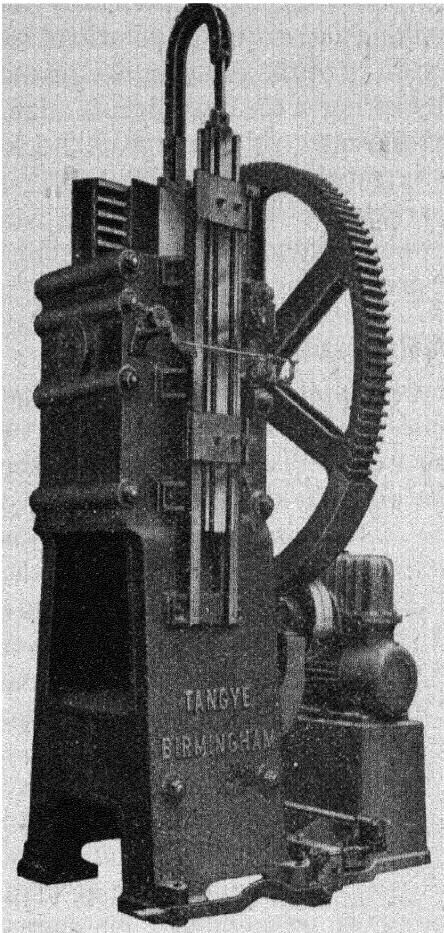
DOUBLE-RACK DRAWING PRESS
